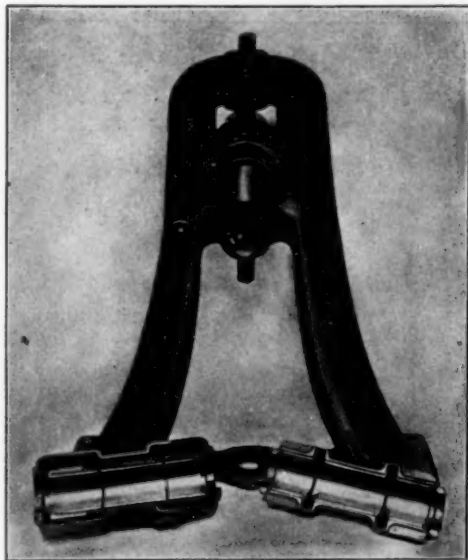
TYPE OF RING-OILED BABBITT BEARING USED IN TESTS
